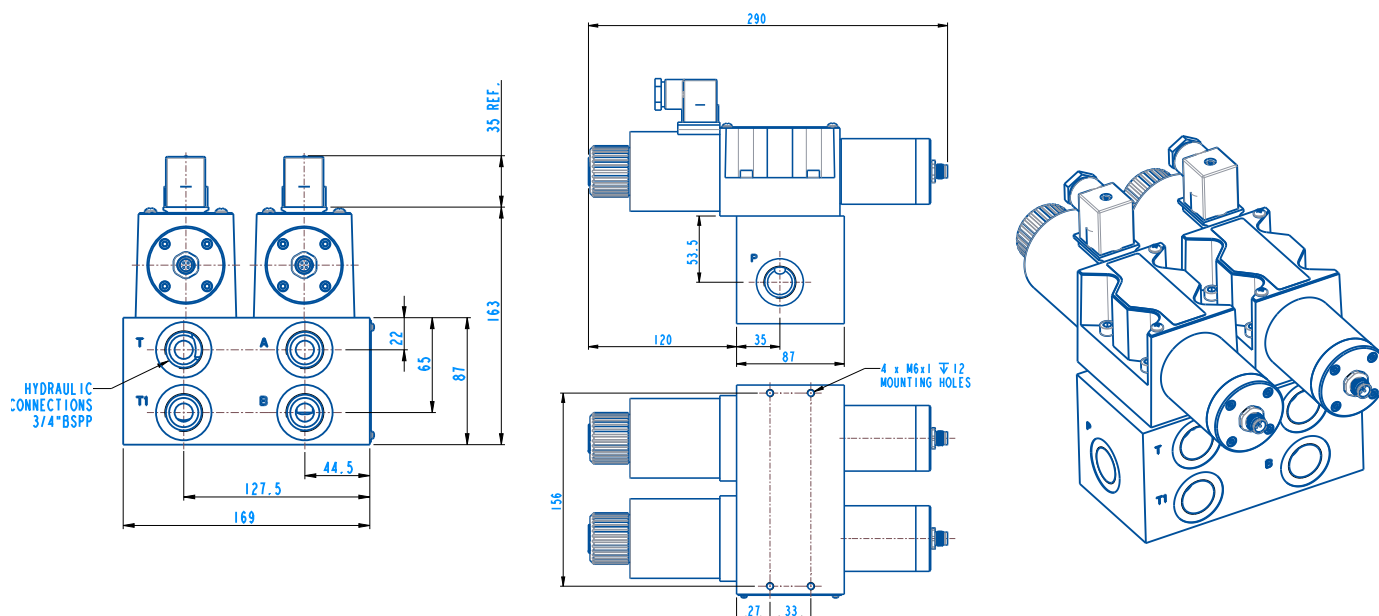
Dimensional Drawing - HSV-03AD-2-G075-MP0 - 40LPM - 3/4" Port Connection BSP - M12
